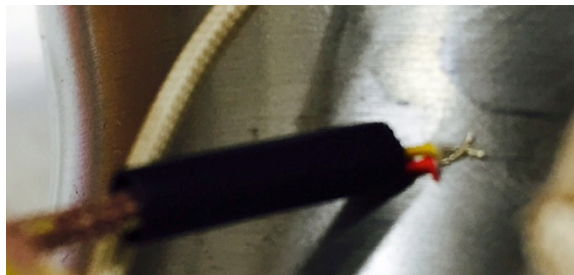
Outer surface junction formed using 24 gauge K-type thermocouple wires resistance welded to the outside of the nozzle body.
